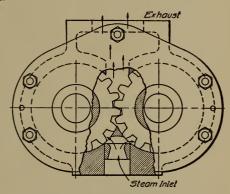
Section of Spiro Cylinder and Rotors at Midlength
